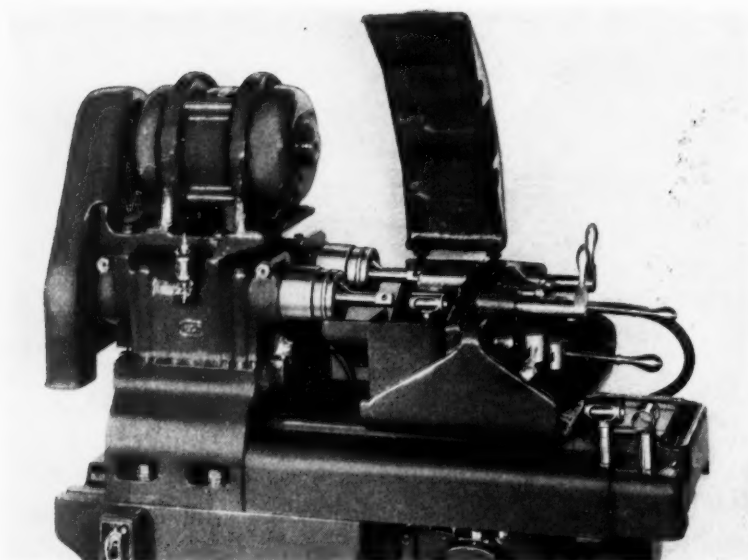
Steel Tube Piston with Large Hole in One Side, Bored at the Rate of 137 an Hour
